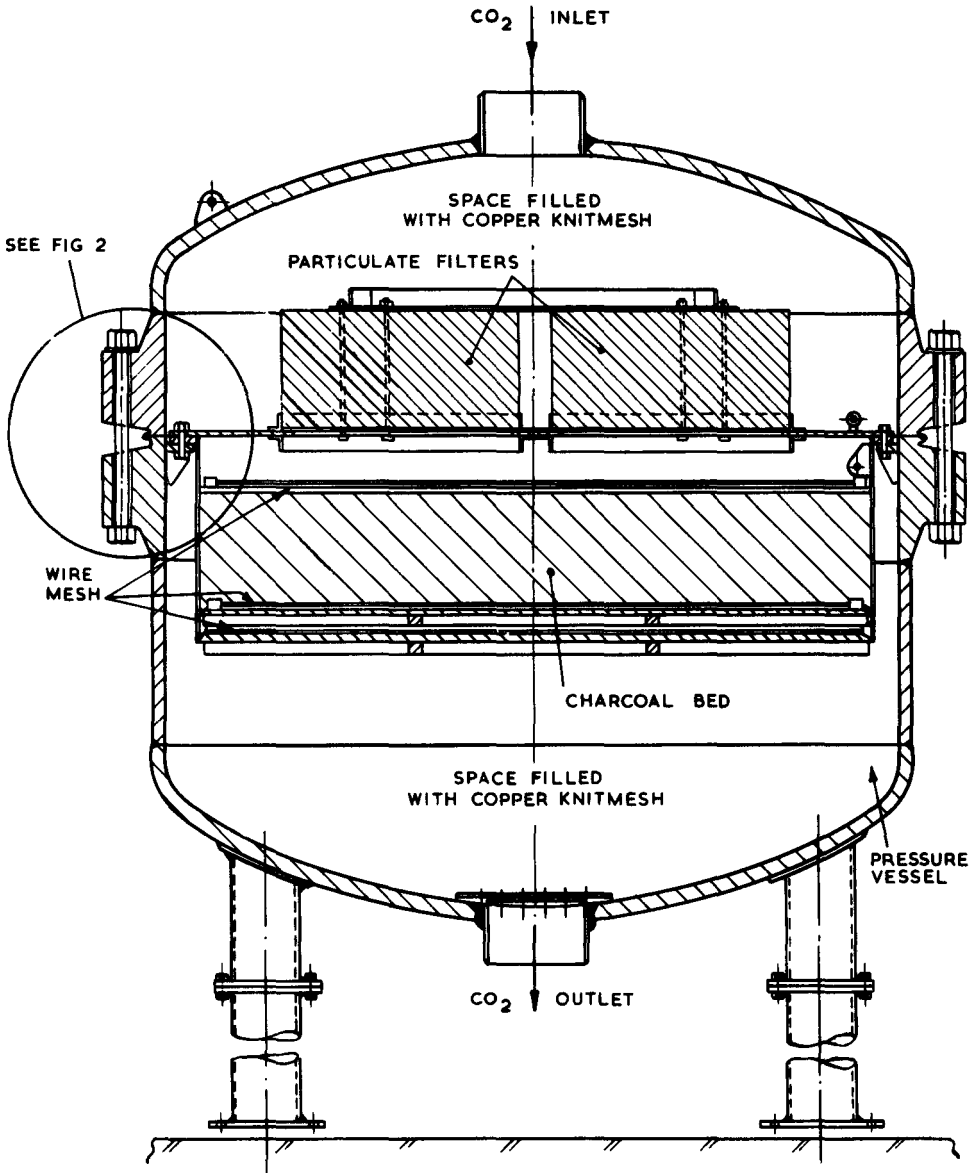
TYPICAL ARRANGEMENT OF FISSION PRODUCT TRAPPING PLANT.
